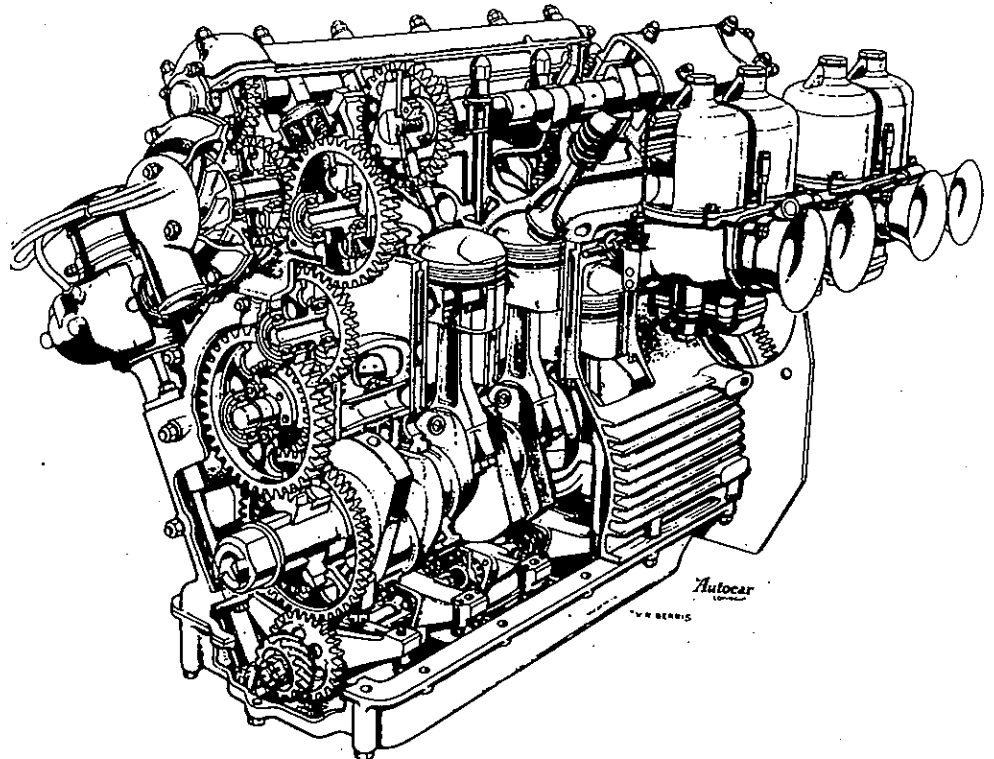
Cut-away drawing of F.P.F. 4 cyl engine
